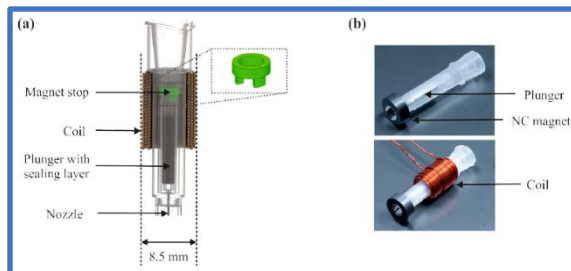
Kartmann's coil design (a) CAD model of the one-part valve body with an insert molded polyimide nozzle. The plunger with a 1 mm thick silicone layer is inserted and the valve is closed with a stopper (green); (b) Photographs of the first samples of the injection molded, disposable, non-contact dispensing valve with and without coil. [74].
